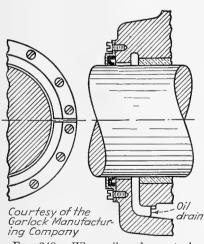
When oil seals are to be installed after a mechanism has been assembled or to preclude the necessity of disassembling heavy shafts and bearings when making seal renewals, split seals can be used in such installations. The spreader spring and packing ring are split, whereas the retaining cup is made in two halves. The packing is scarf-cut to form an oiltight joint when assembled.
